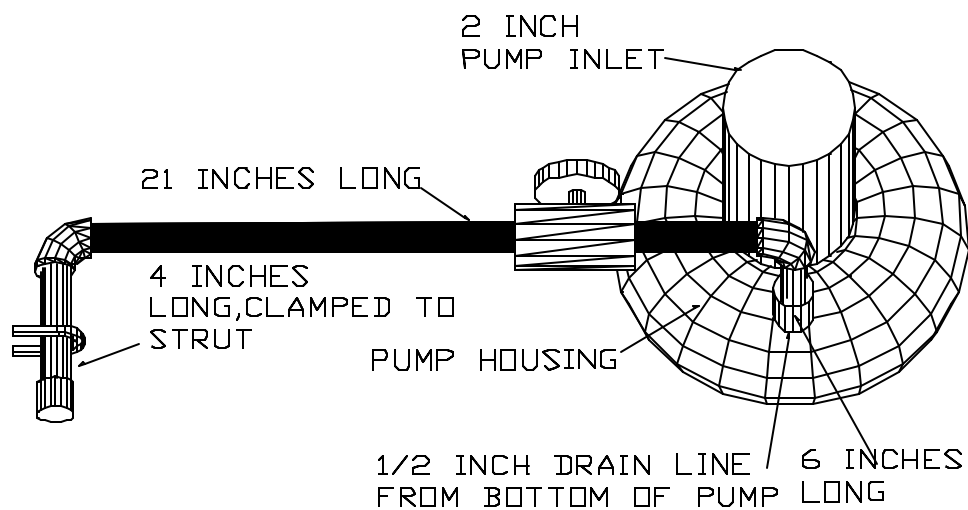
AutoCad 3D drawing of CPVC piping configuration
